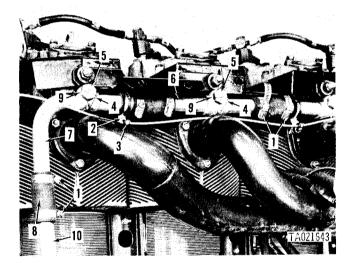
Removing or installing fuel filter constant bleed hose.
